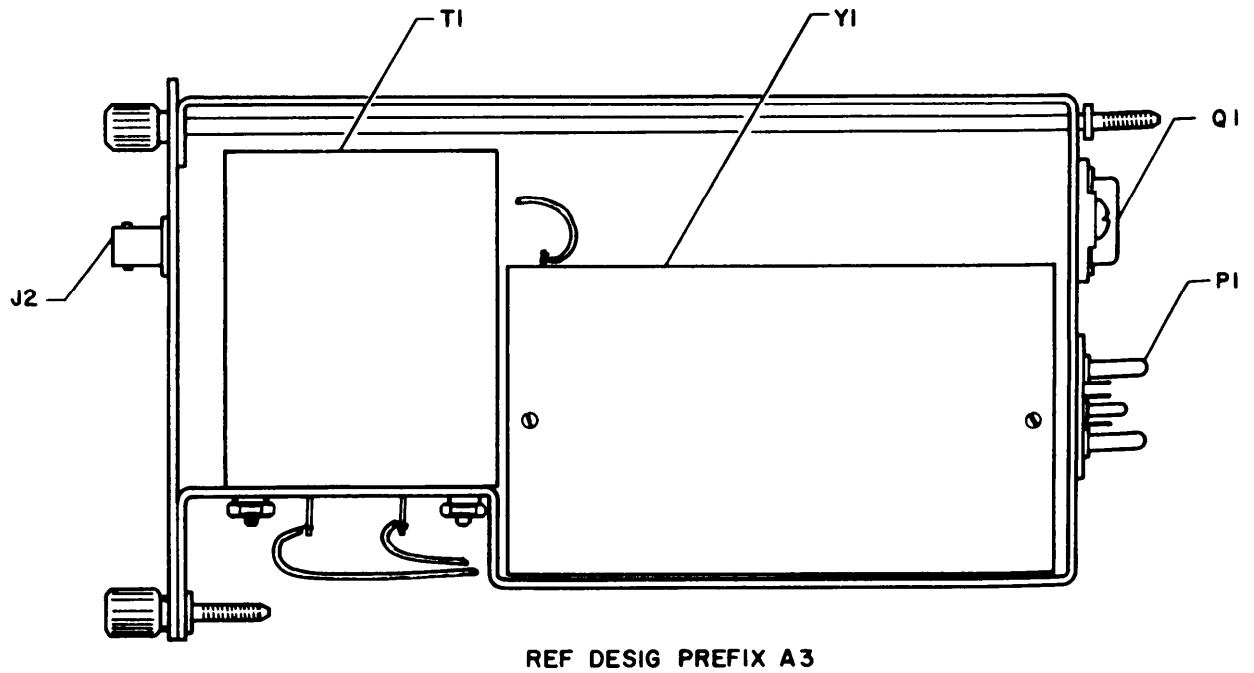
Radio Frequency Oscillator A3, Right-Side View, Location of Parts
